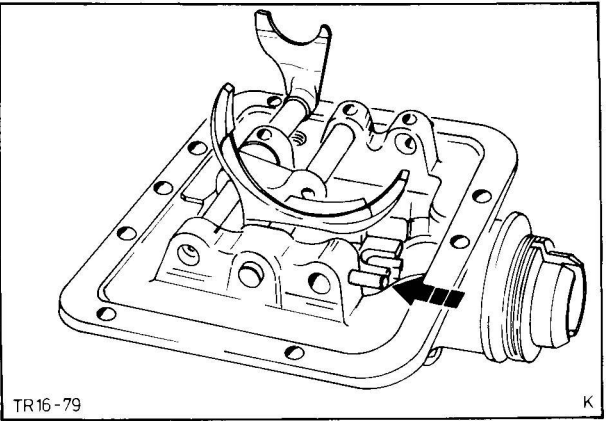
Insert interlock plunger between 3rd/4th gear and 1st/2nd gear selector rails
